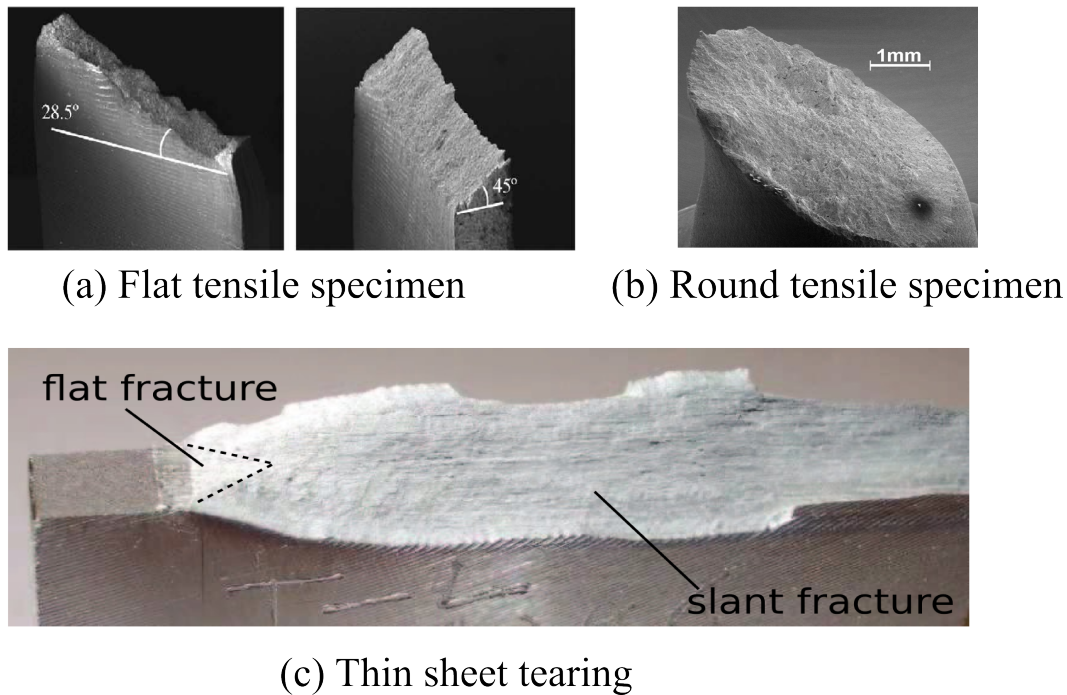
(a) Slant fracture in the transverse plane and thickness plane of flat tensile specimen [Asserin–Lebert et al., 2005]. (b) Slant fracture surface in a round tensile specimen [Wang et al., 2011]. (c) Flat to slant fracture in thin sheet tearing test [Chen, 2011].
